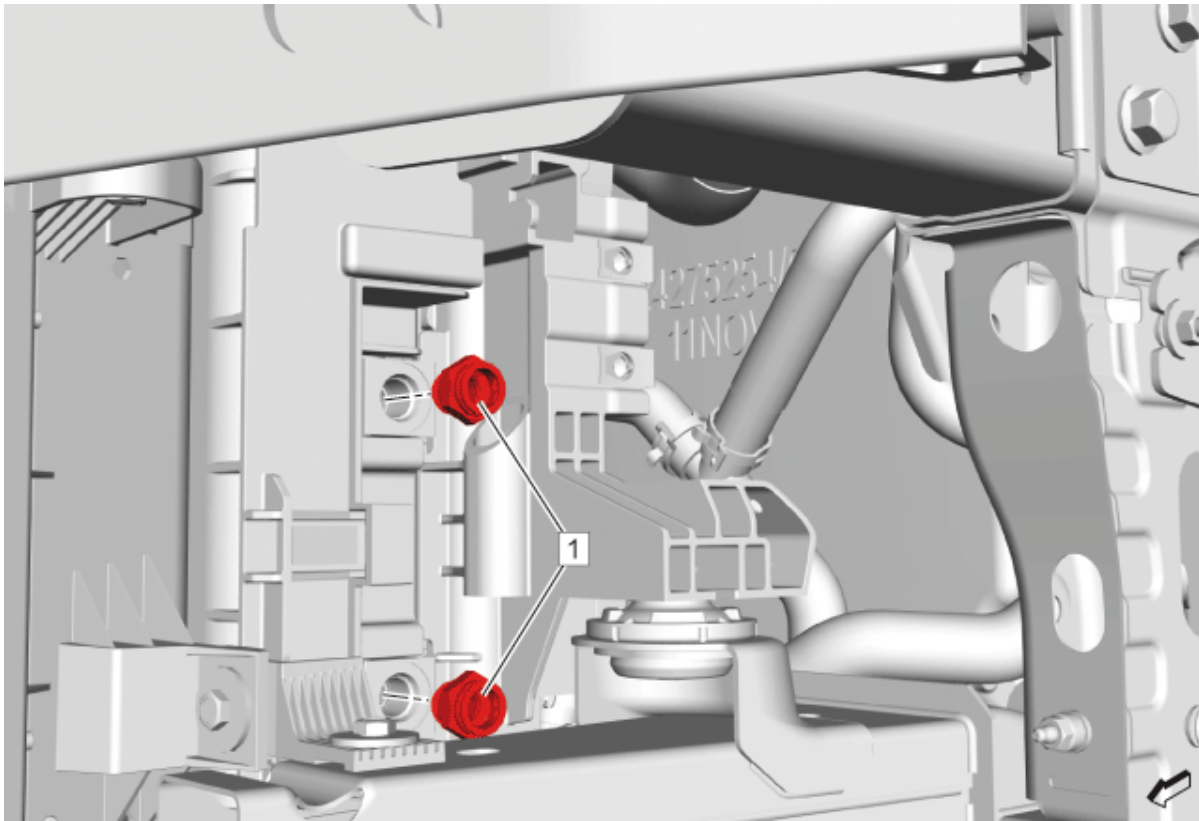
Transmission Fluid Cooler Pipe Fitting
